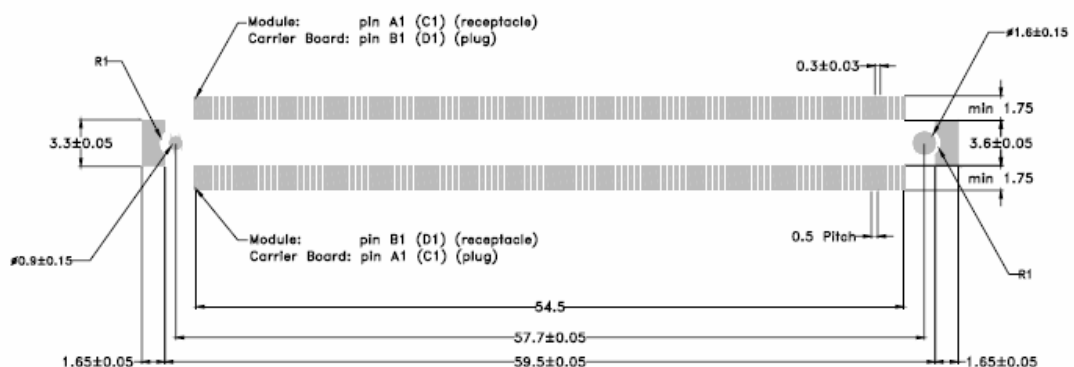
SOM-Express Carrier Board Plug (8mm Version)
